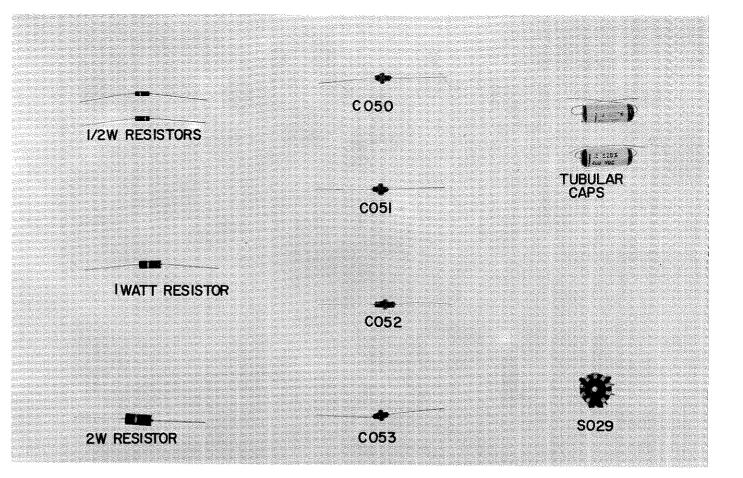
D. The parts used in wiring the rear circuit board are shown above and listed below.
